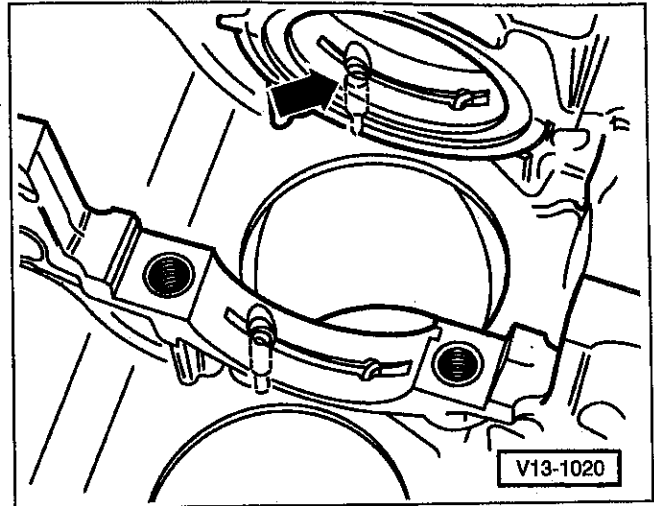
Oil spray nozzles in engine block of AAA engine (arrow). Nozzles are fitted at main bearings 2 through 7.
